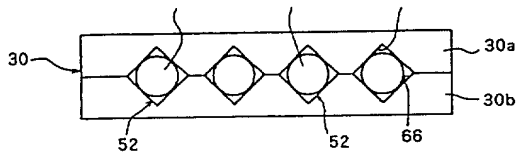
is a schematic diagram of a segmented strip assembly. The assembly consists of a series of four diamond-shaped segments connected in a chain. The entire chain is enclosed within a rectangular frame. The left end of the frame is labeled 30. The top and bottom horizontal sections of the frame are labeled 30a and 30b, respectively. The diamond segments are labeled 52. The rightmost end of the frame is labeled 66.
